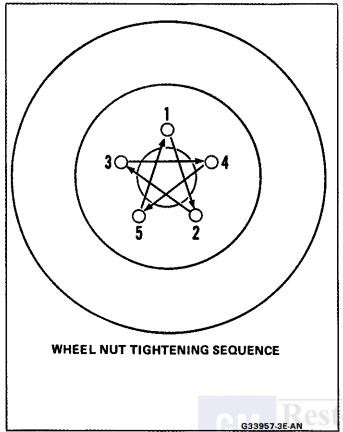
5 Hole Wheel Nut Tightening Sequence
